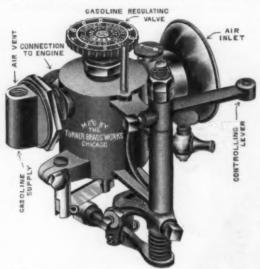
The Turner Carburettor for Four-Cycle Auto Engines.
